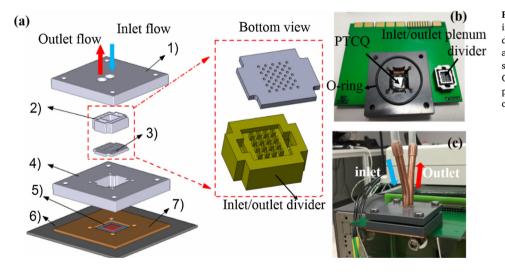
Demonstration of the chip level 4×4 impingement jet cooler: (a) CAD design details of different individual parts; (b) photo with the arrangement of nozzle placement; (c) final assembly of 4×4 impingement jet cooler. (1-Cover layer, 2-inlet/outlet plenum, 3-nozzle plate, 4-support structure, 5-PTCQ thermal test chip. 6-PCB, 7-copper spacer).
